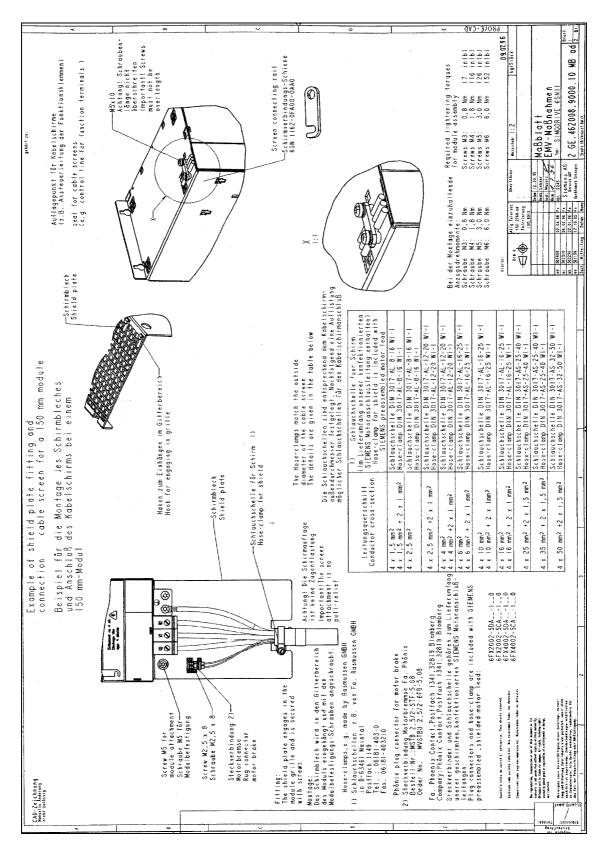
EMC measures, Sheet 1 (shield connecting plate)
